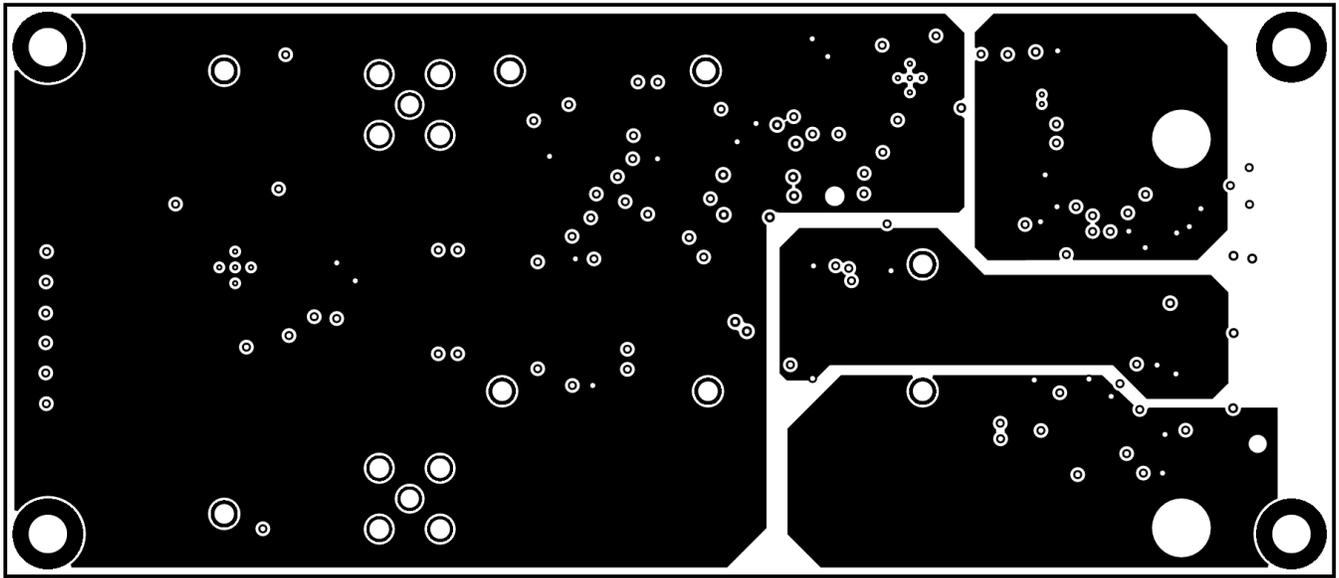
REF6025EVM PCB Layer 3: Power Planes
